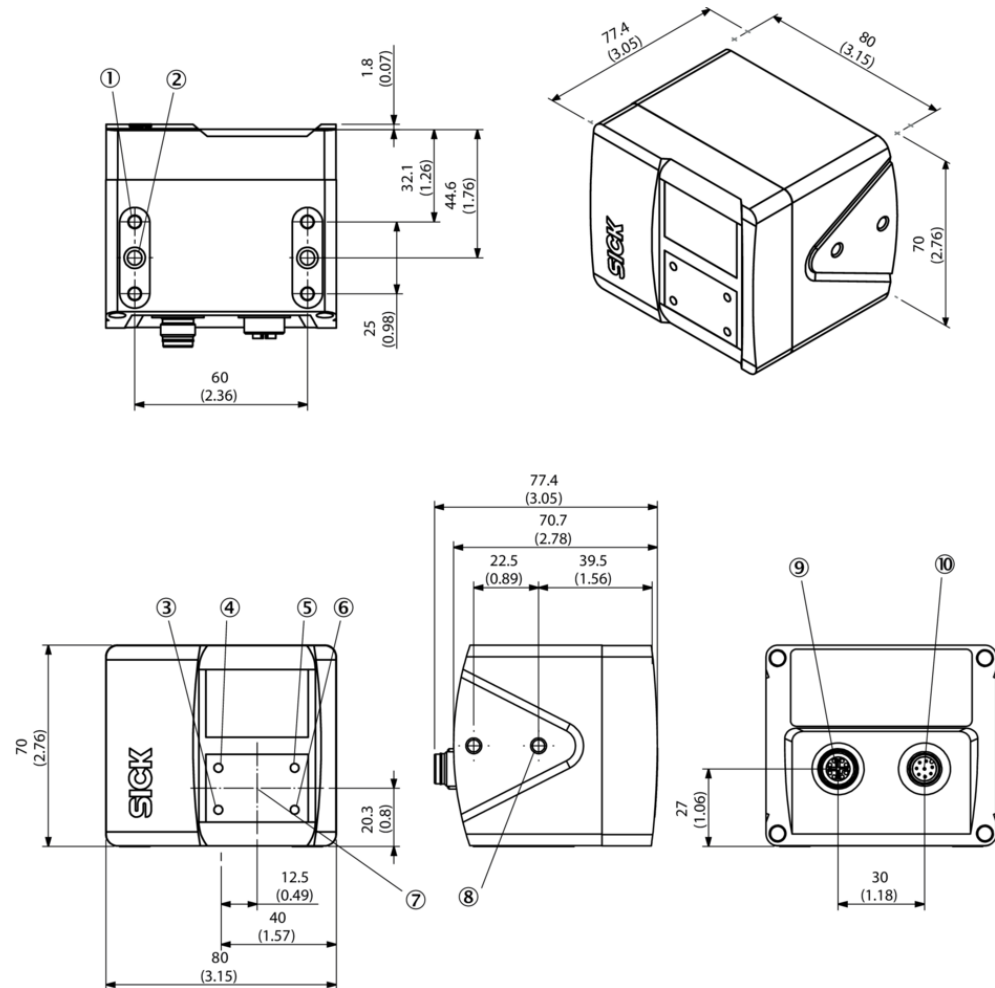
Visionary-T Mini camera dimensional drawing (not true-to-scale)
